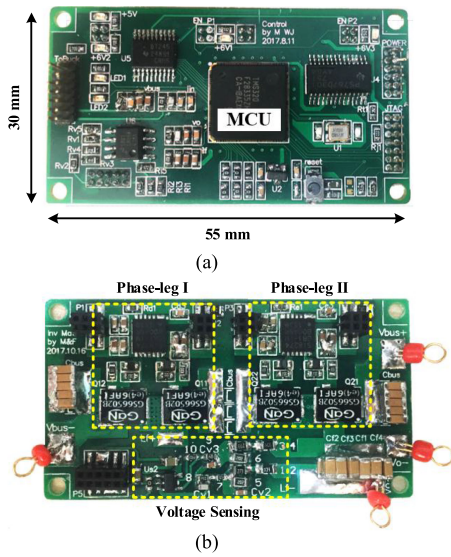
PCB of the full bridge inverter. (Top view). (a) Control board. (b) Power board.
